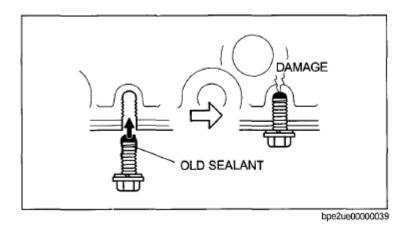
Identifying Cylinder Block Damages (Old Seal Adhering Bolt)
